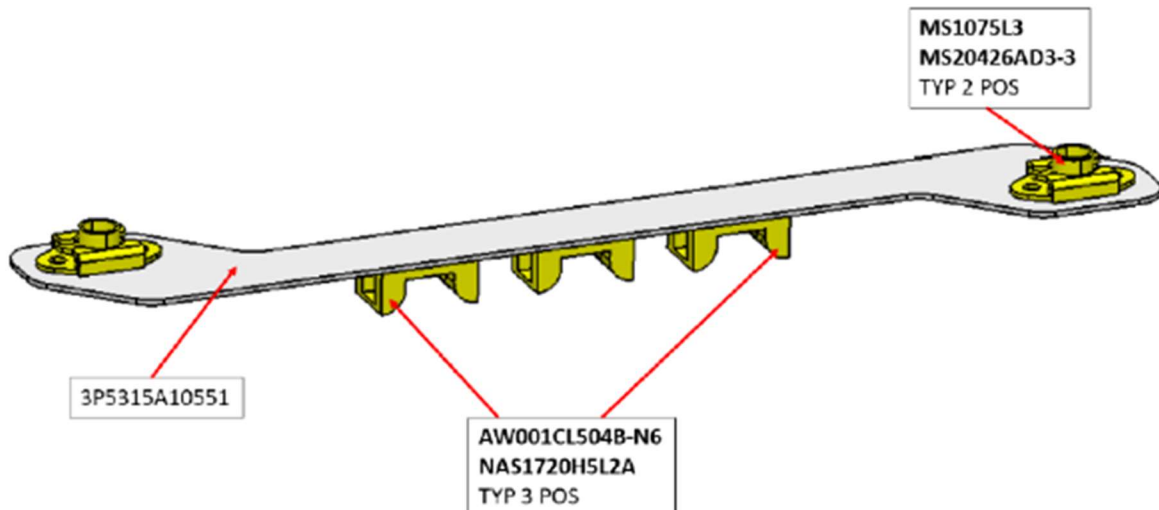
The 3D figure in the New Strip Assembly Manufacturing Card, 3P5315A10531
